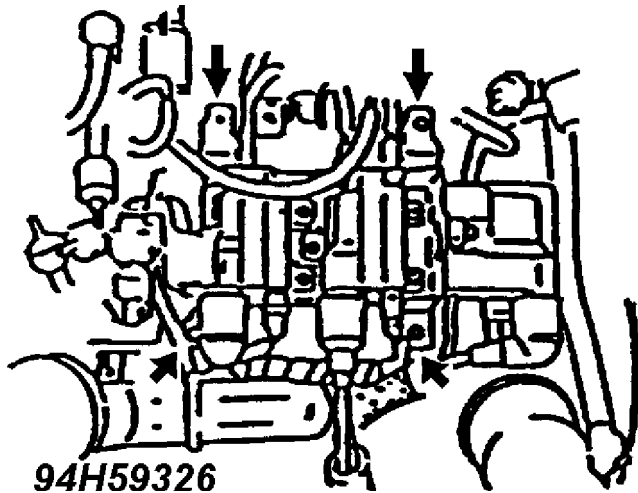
Four Nuts Holding the Ignition Coil Assembly
